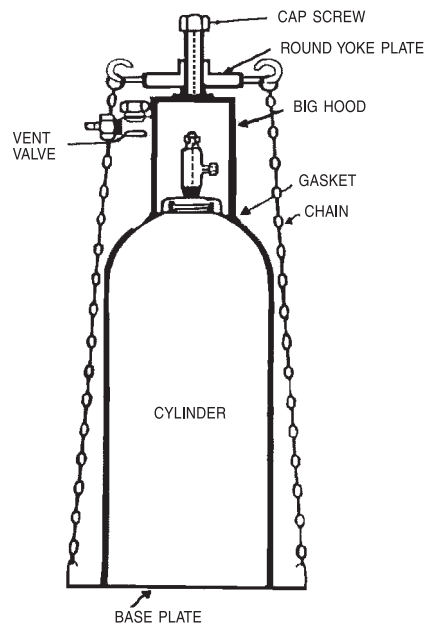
CYLINDER VALVE HOOD ASSEMBLY DEVICE
